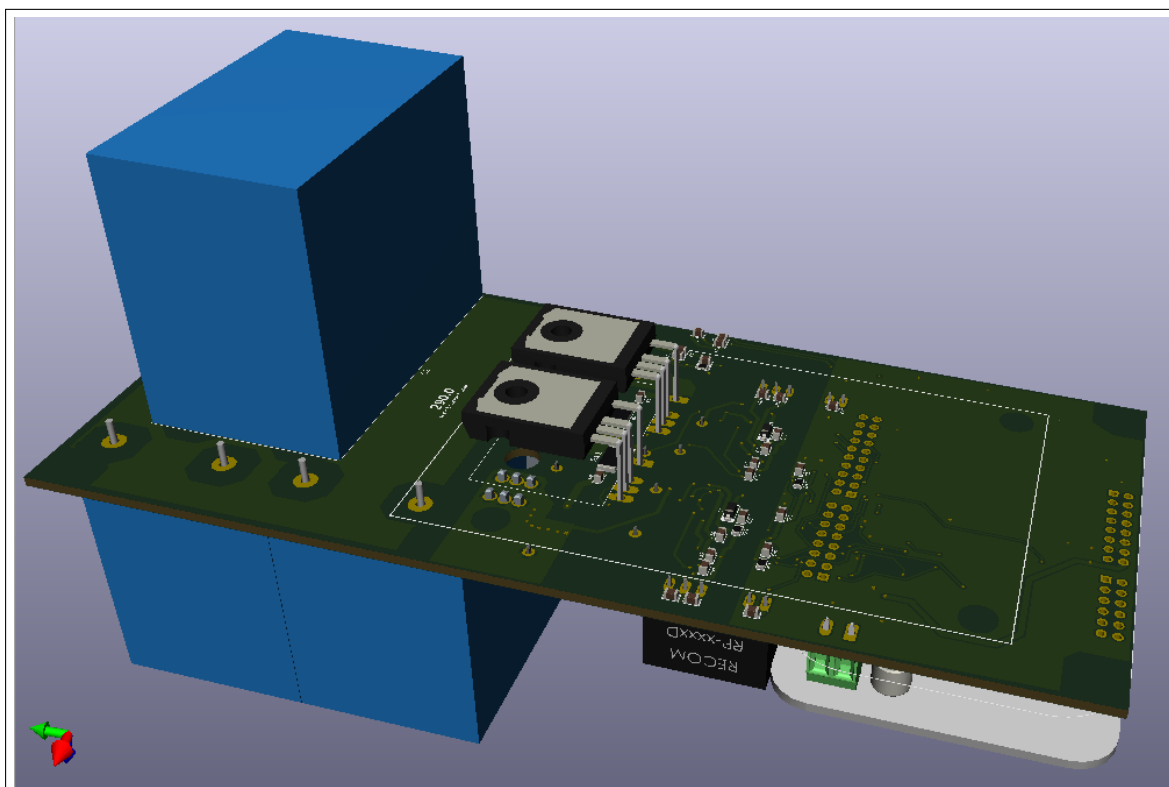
Bottom view of the 3D rendering (heat sink not included.)
